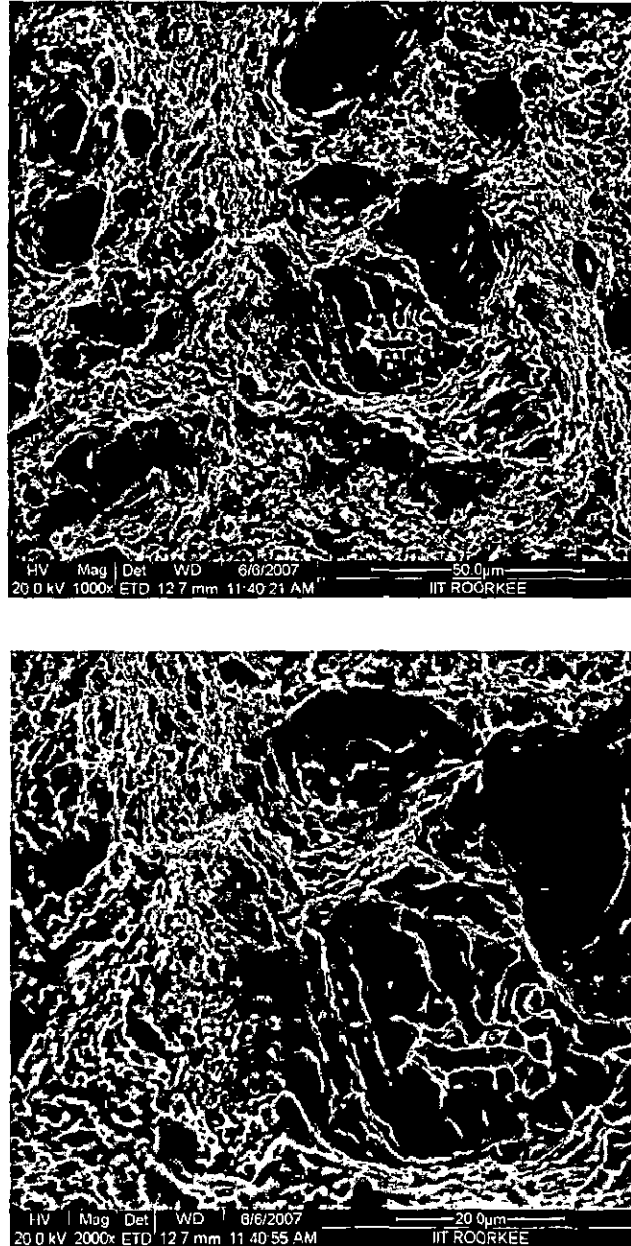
SEM micrographs of fracture surface of 13/4 steel after tensile test
